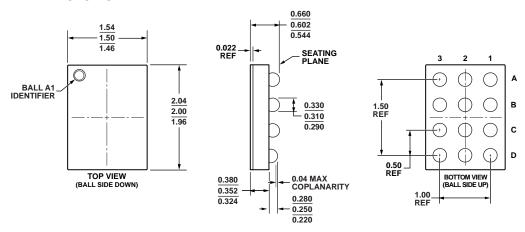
12-Ball Wafer Level Chip Scale Package [WLCSP] (CB-12-4) Dimensions shown in millimeters
